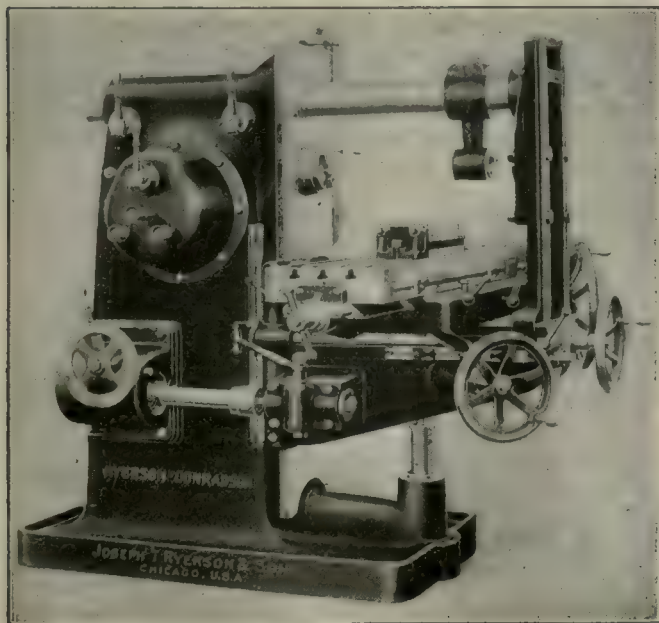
THE RYERSON-CONRADSON NO. 3 PLAIN MILLING MACHINE
